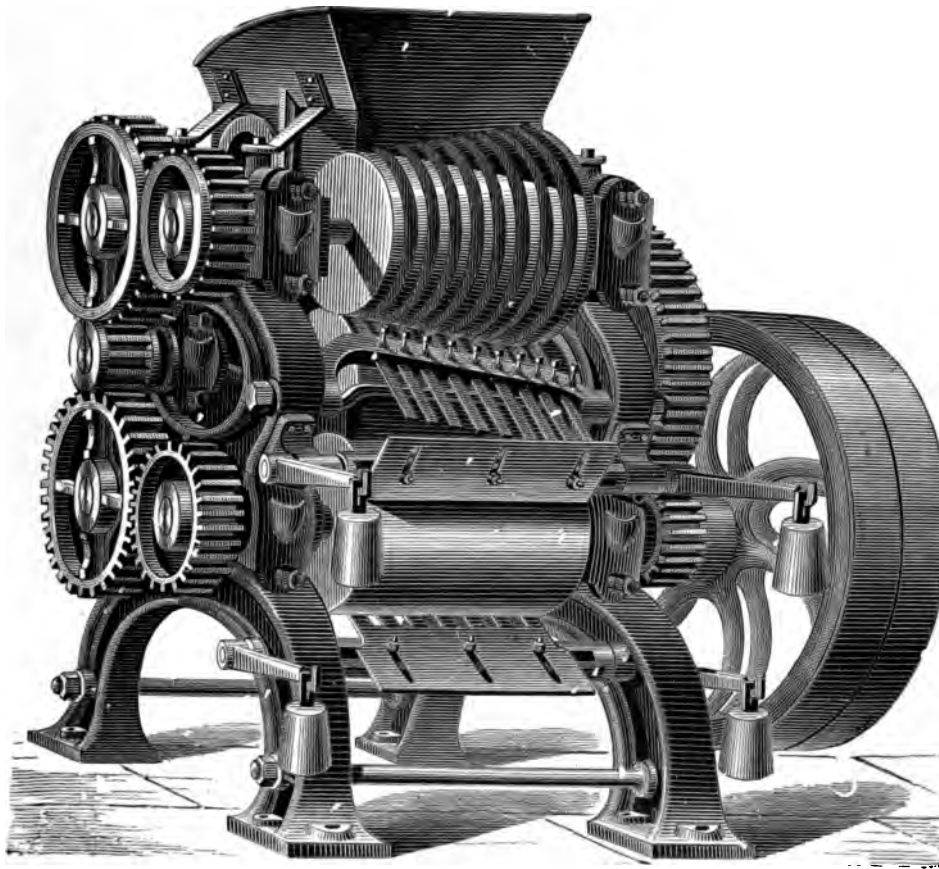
Rolling Machine with Fluted Cones above (Boulet).
